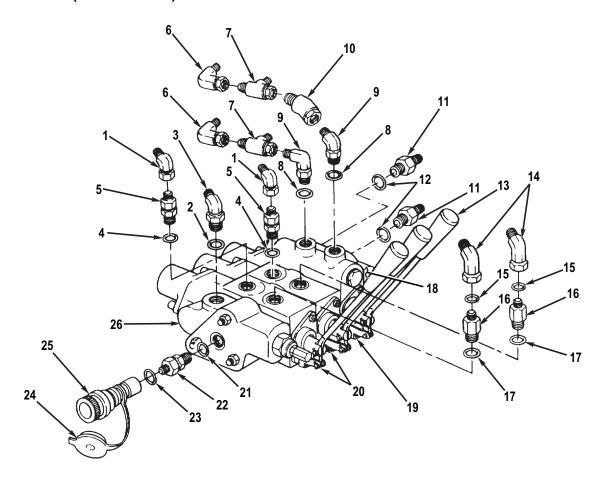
Hydraulic Control Valve (Front Dolly) Fittings Installation.
